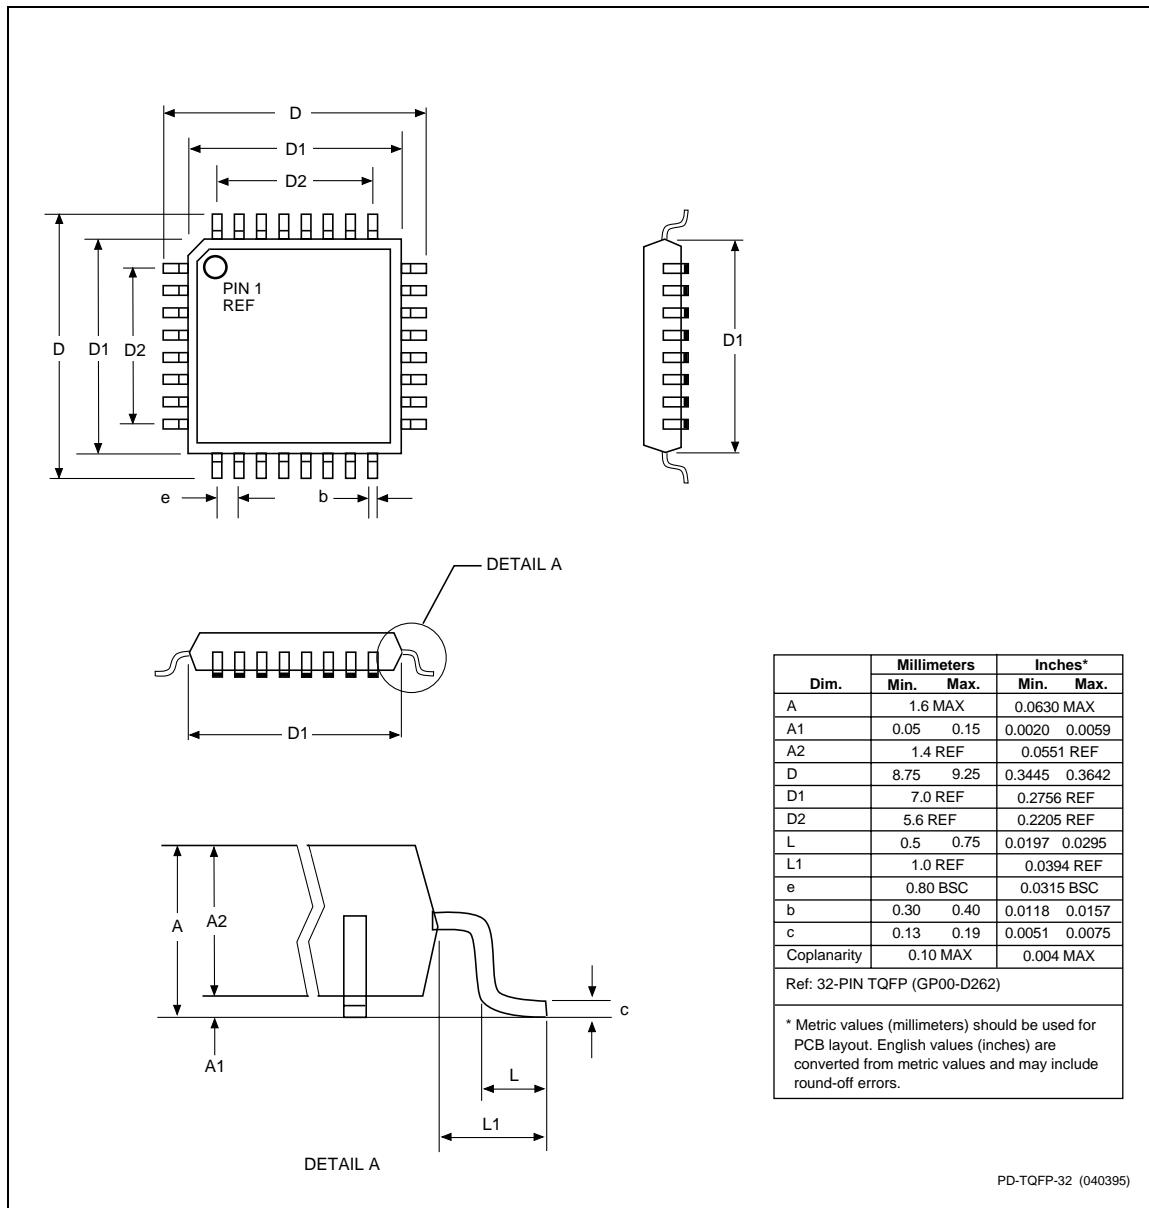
LSD Package Dimensions - 32-Pin TQFP
